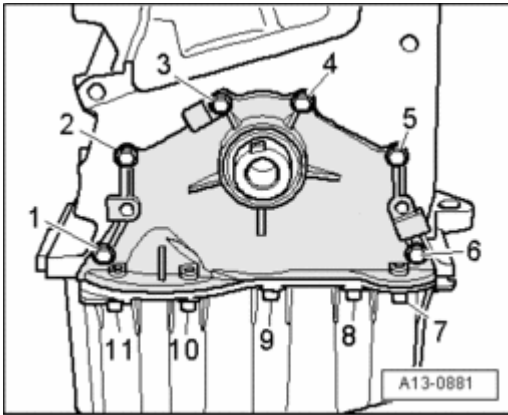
Identifying Sealing Flange Bolts Tightening Sequence
